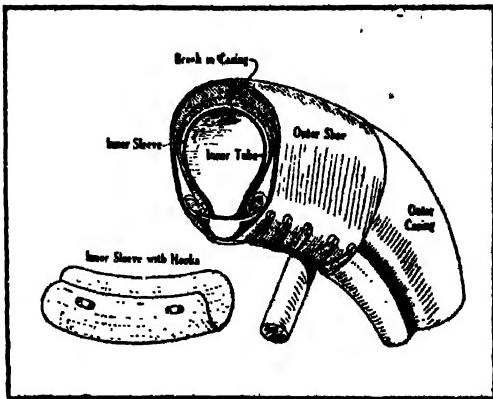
Showing Method of Using Inner Sleeve and Outer Shoe in Making Temporary Repair of Blowout in Casing.
